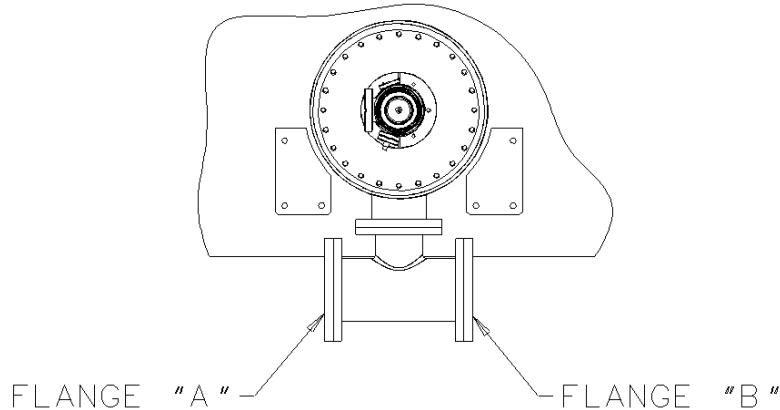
A typical coupler port showing Flange “A” and Flange “B”.
